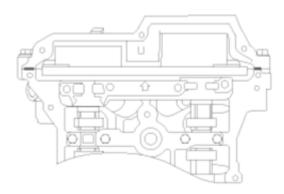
Identifying Sealant Application Area Courtesy of KIA MOTORS AMERICA, INC.
